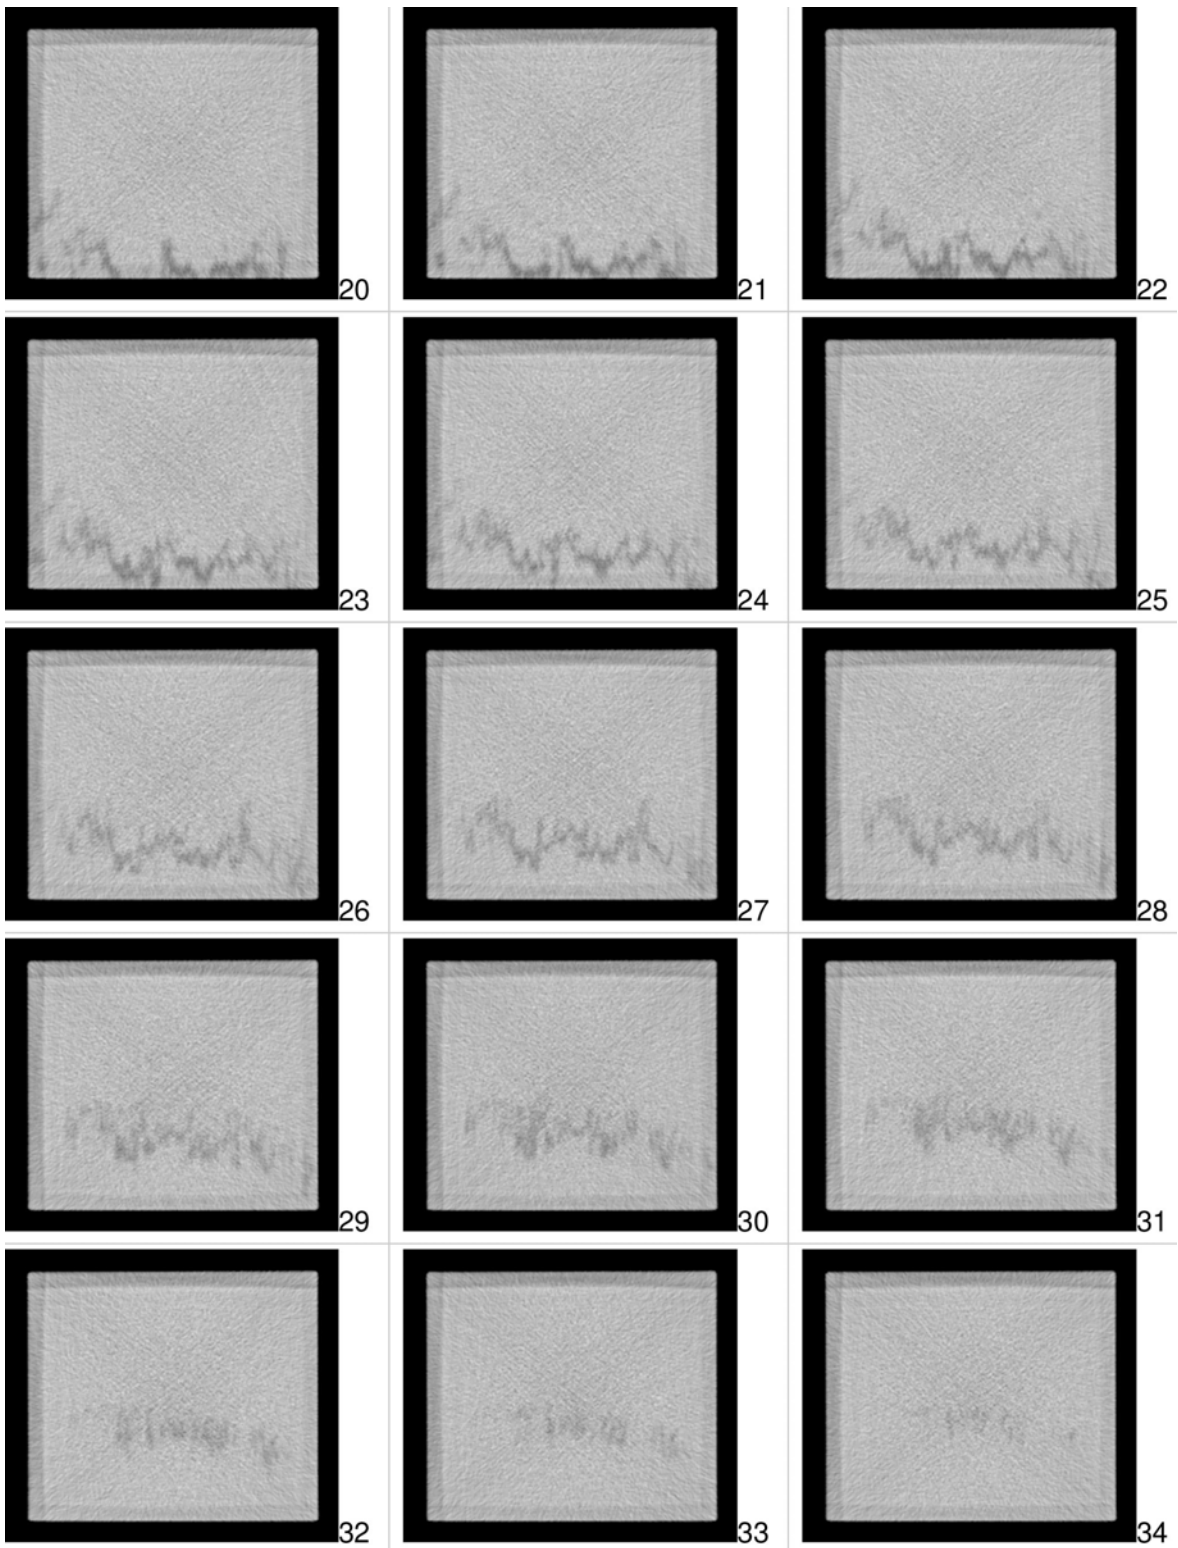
CT-slice #34 ( $z=112.32$  mm) of test block P32 (N 220 AD U TS 5), crack depth: 11.3 mm ( $\pm 2$  pixel = 0.24 mm), 37.3% of weld thickness
